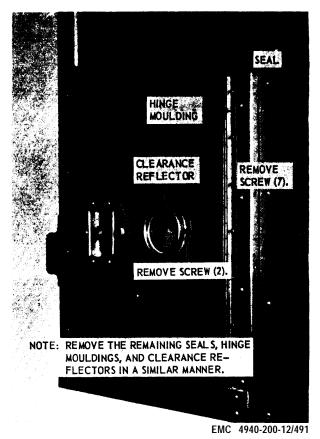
Hinge moulding, seal, and clearance reflector, removal and installation.
